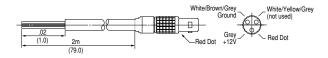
83006-60004 DC Bias Cable. Dimensions in meters and (inches).
